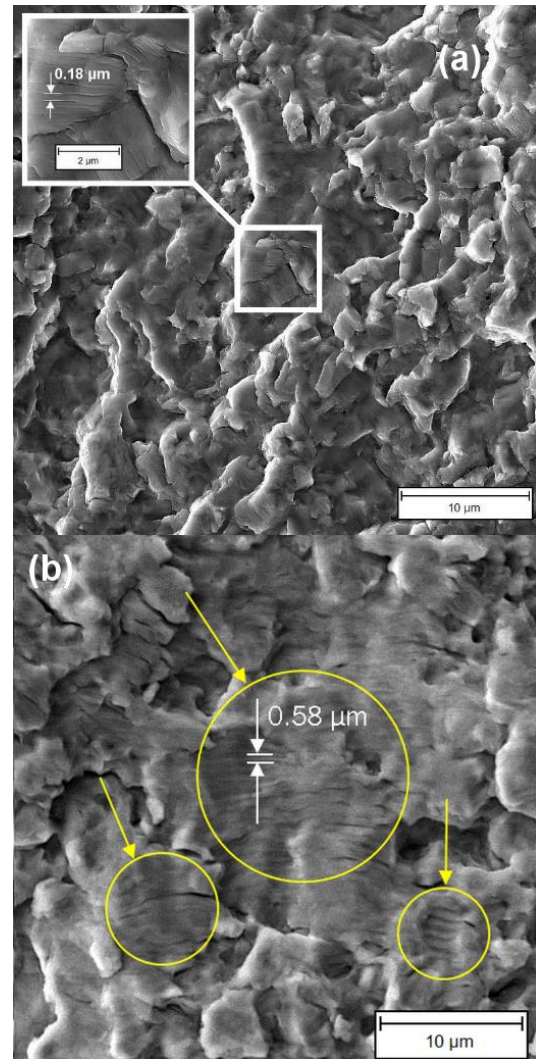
Striation features: (a) corrosion fatigue fracture surface in Ringer's solution, and (b) fatigue fracture surface in air.
